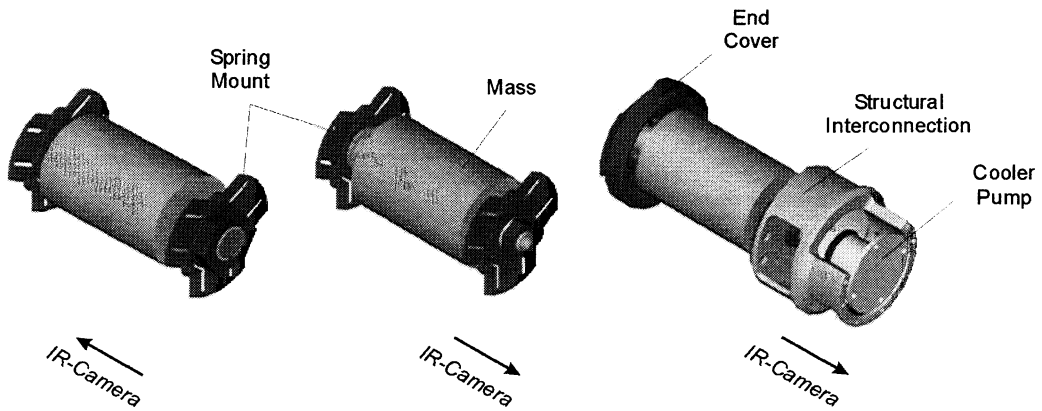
Inner MVC structure assembly, looking from actuator bottom (left), actuator head (middle, right)
